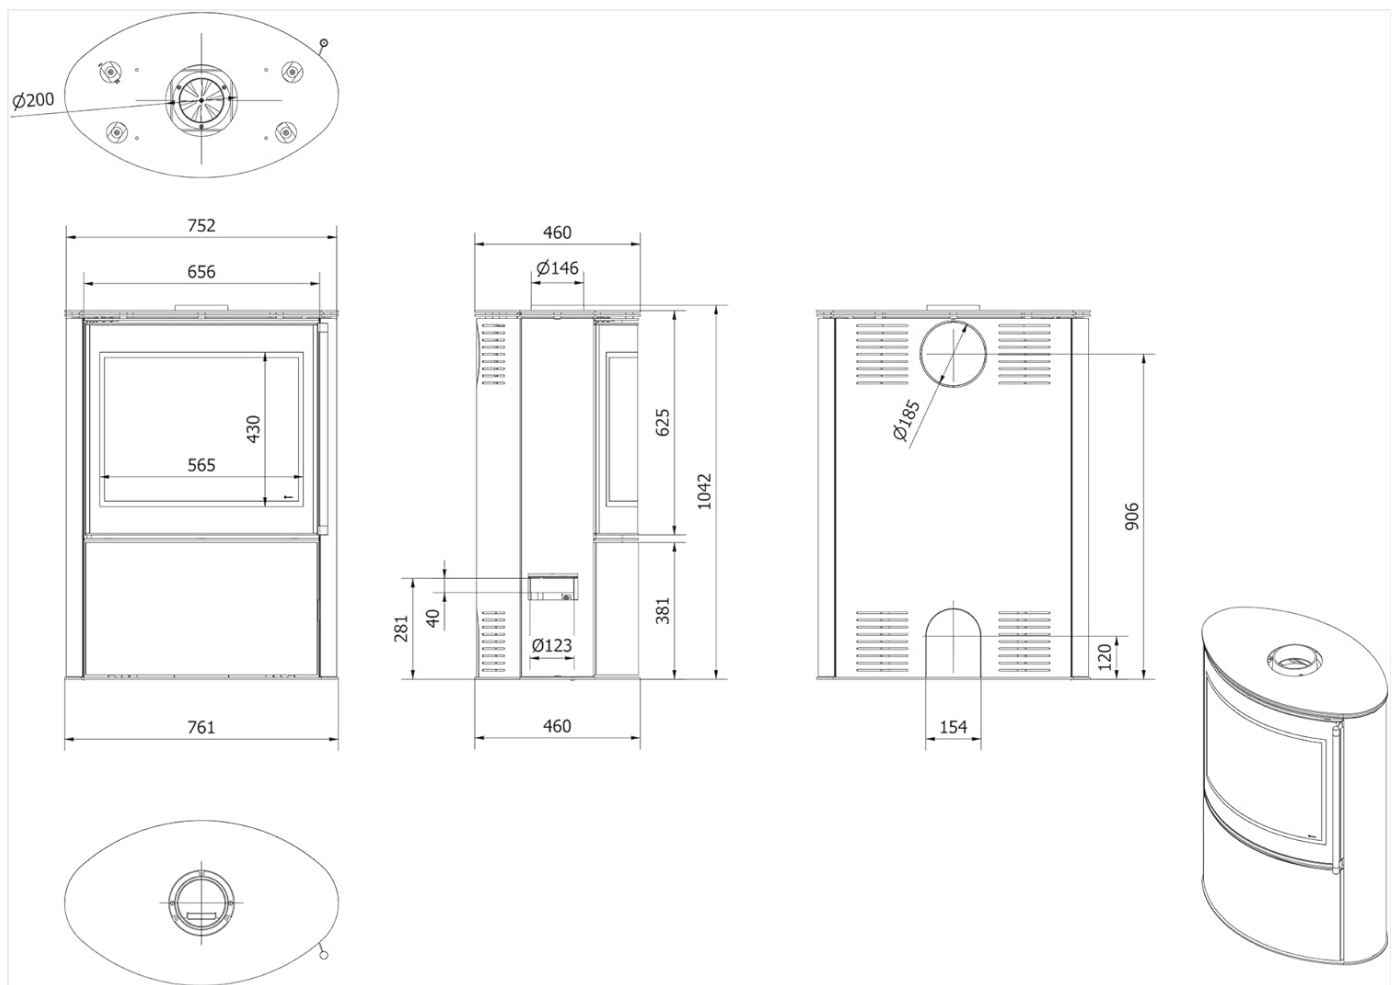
Technical drawing showing the dimensions and connection points for the KRATKI Bjorn stove, including flue outlet (\varnothing 150mm) and external air supply (\varnothing 125mm).
